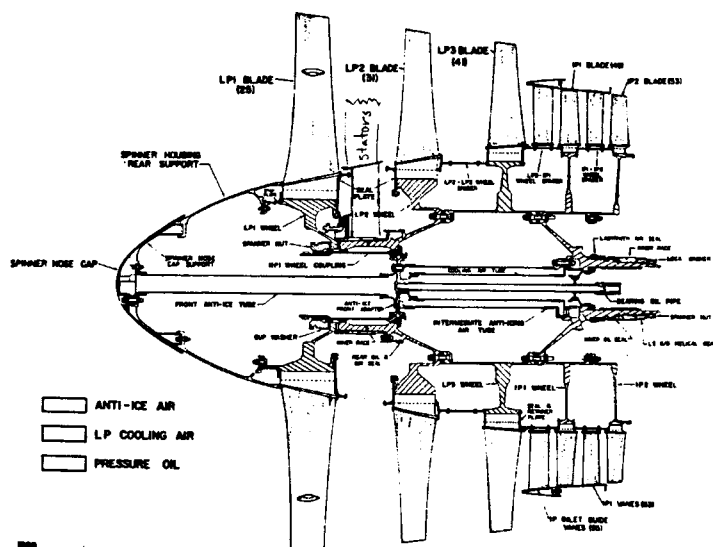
Low pressure-intermediate pressure compressor rotor section view of TF41 engine.
